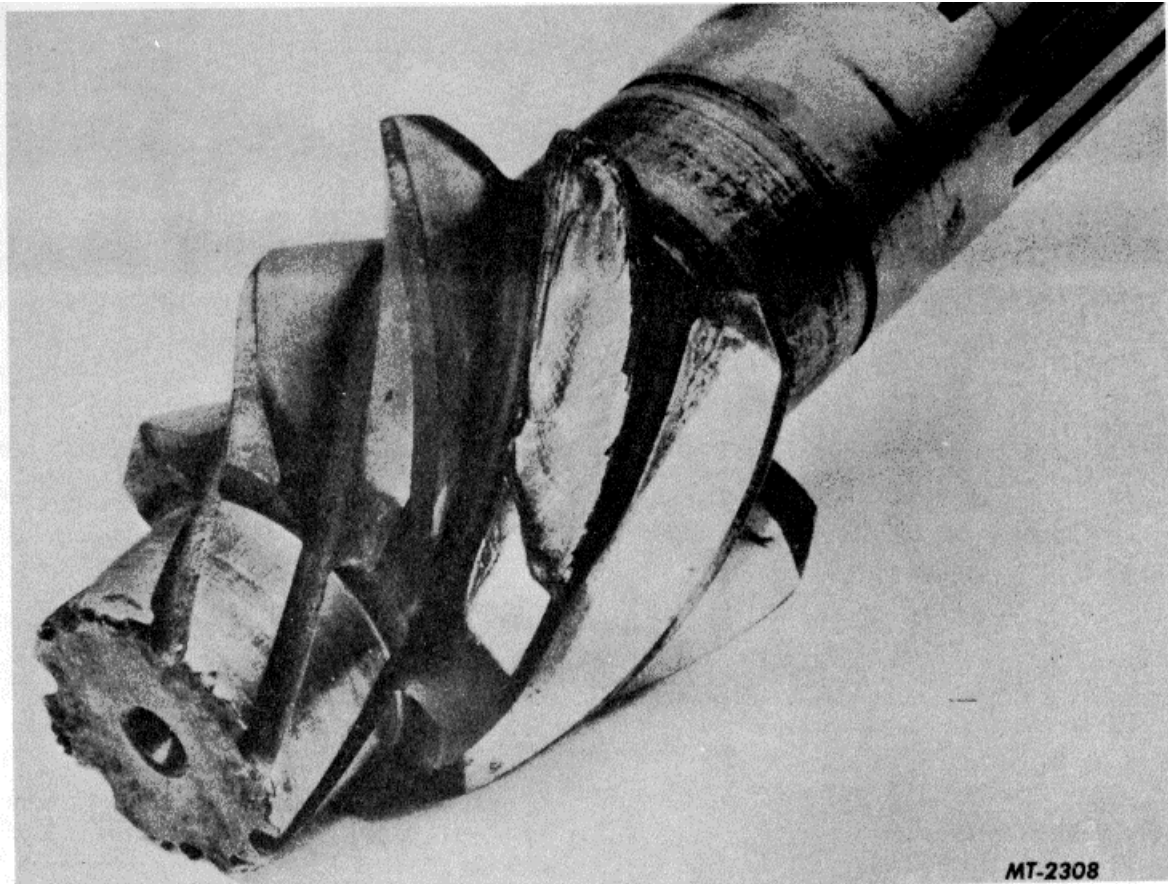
Fatigue Fracture-Bevel Drive Pinion
